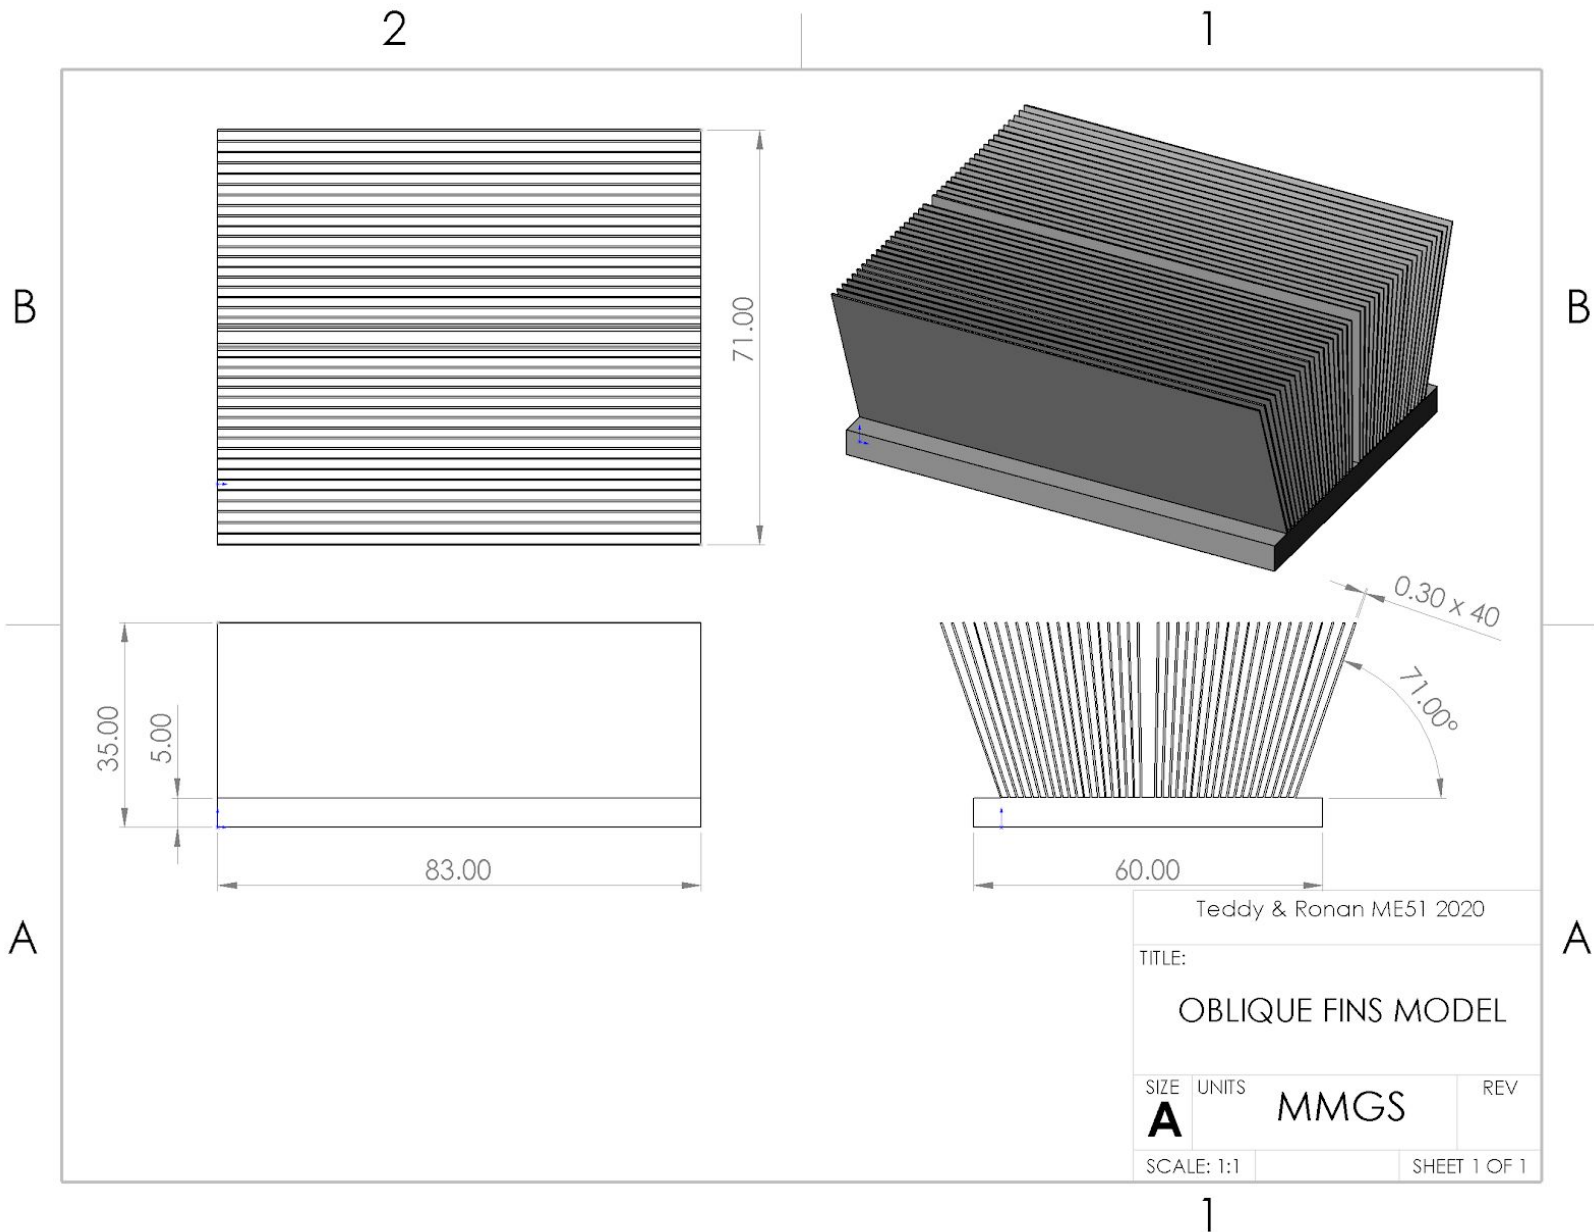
Solidworks Drawing of Oblique Fins ($\alpha = 71^\circ$) Heat Sink.
